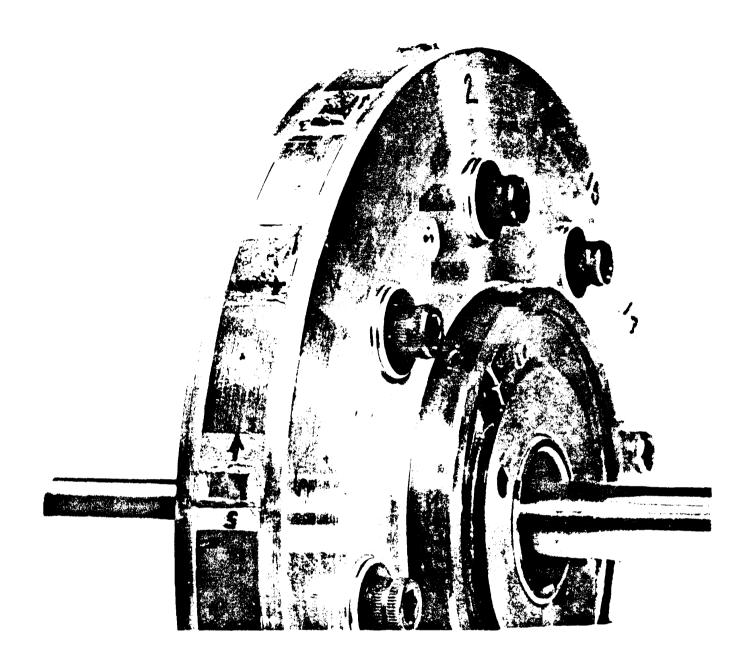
Composite grinding wheel assembled with arbor and mounted on balancing mandrel showing the method of labelling single crystal corundum grits
